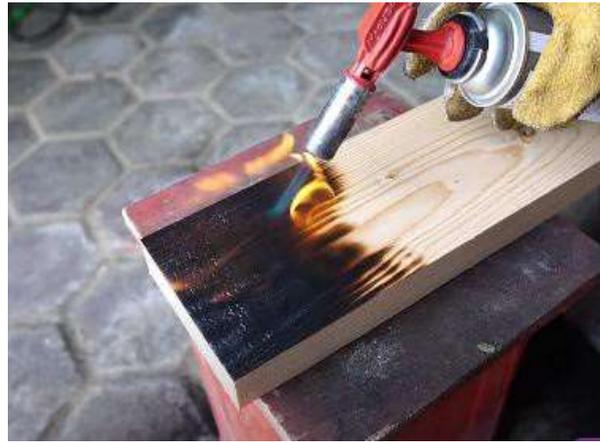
Alternative to Traditional Technique - Burn Process with a Blowtorch [3].
